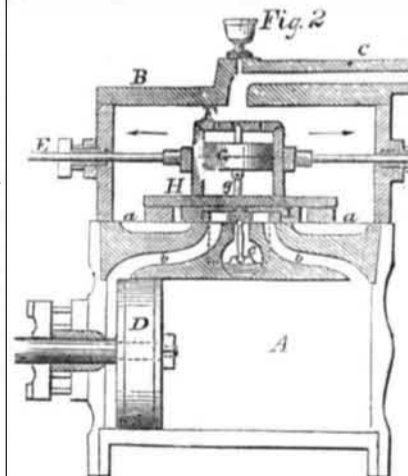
is a vertical section taken through the steam valve chest and cylinder. A is the cylinder, B the steam chest, C the inlet steam pipe, D the piston, E the valve rod, F a small cylinder in the valve chest, which has a small piston, G, in it, having a jointed arm, g, in it, extending down within the exhaust cavity of the valve seat, and rocks on an arbor or shaft therein. The piston, G, is fitted steam tight in its small cylinder, and the pressure of the steam comes upon its top surface. There is a plate or valve driver, to which the small cylinder is attached; it laps around the valve ends leaving a small space between them. I is a chambered slide valve, and a a are cavities in the face of the valve seat, and by the valve connect with the ports that lead to the cylinder, A. The valve driver plate is placed between a valve at each side, hooking around their ends with the small space between them, as shown, for lead; it does not lie nor press on the top of the valves.
